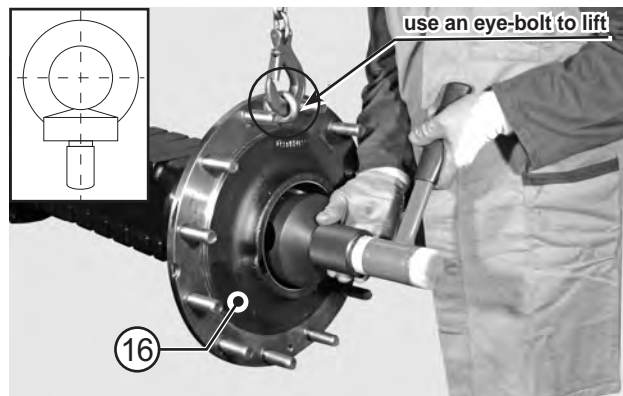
Install the wheel hub (16). If assembly is difficult, use a punch with a suitable diameter to seat it.
